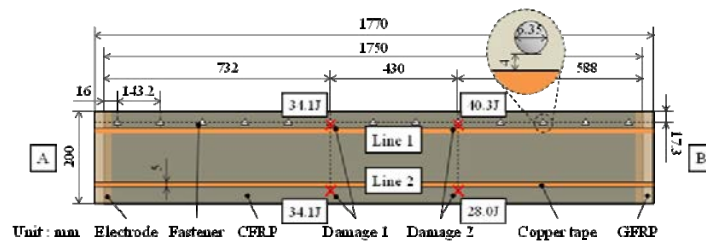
Specimen configuration of bearing failure of fastener hole
